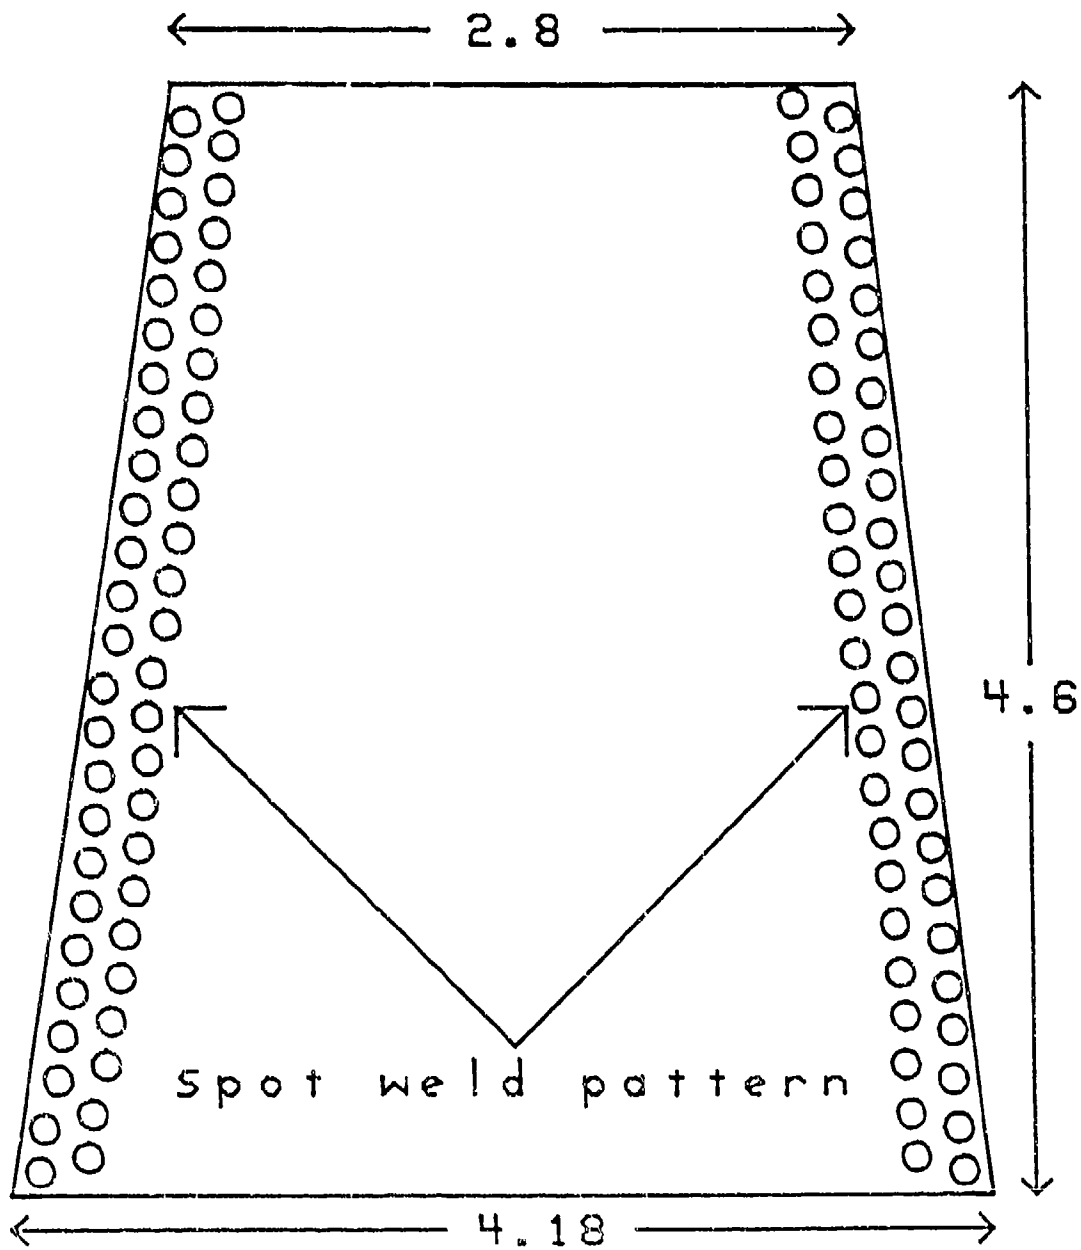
Fixture clamp and spot weld pattern - not to scale.
